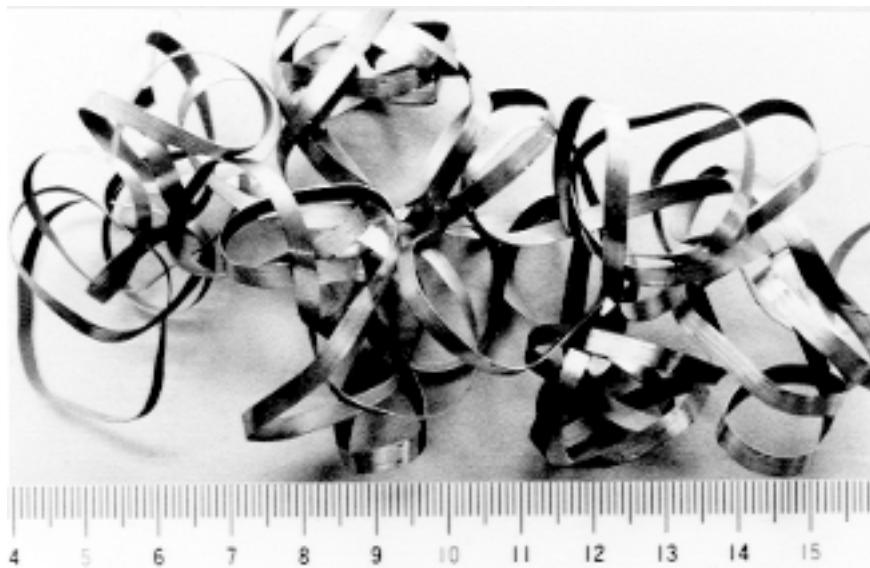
Shiny (burnished) surface on the tool side of a continuous chip produced in turning.
